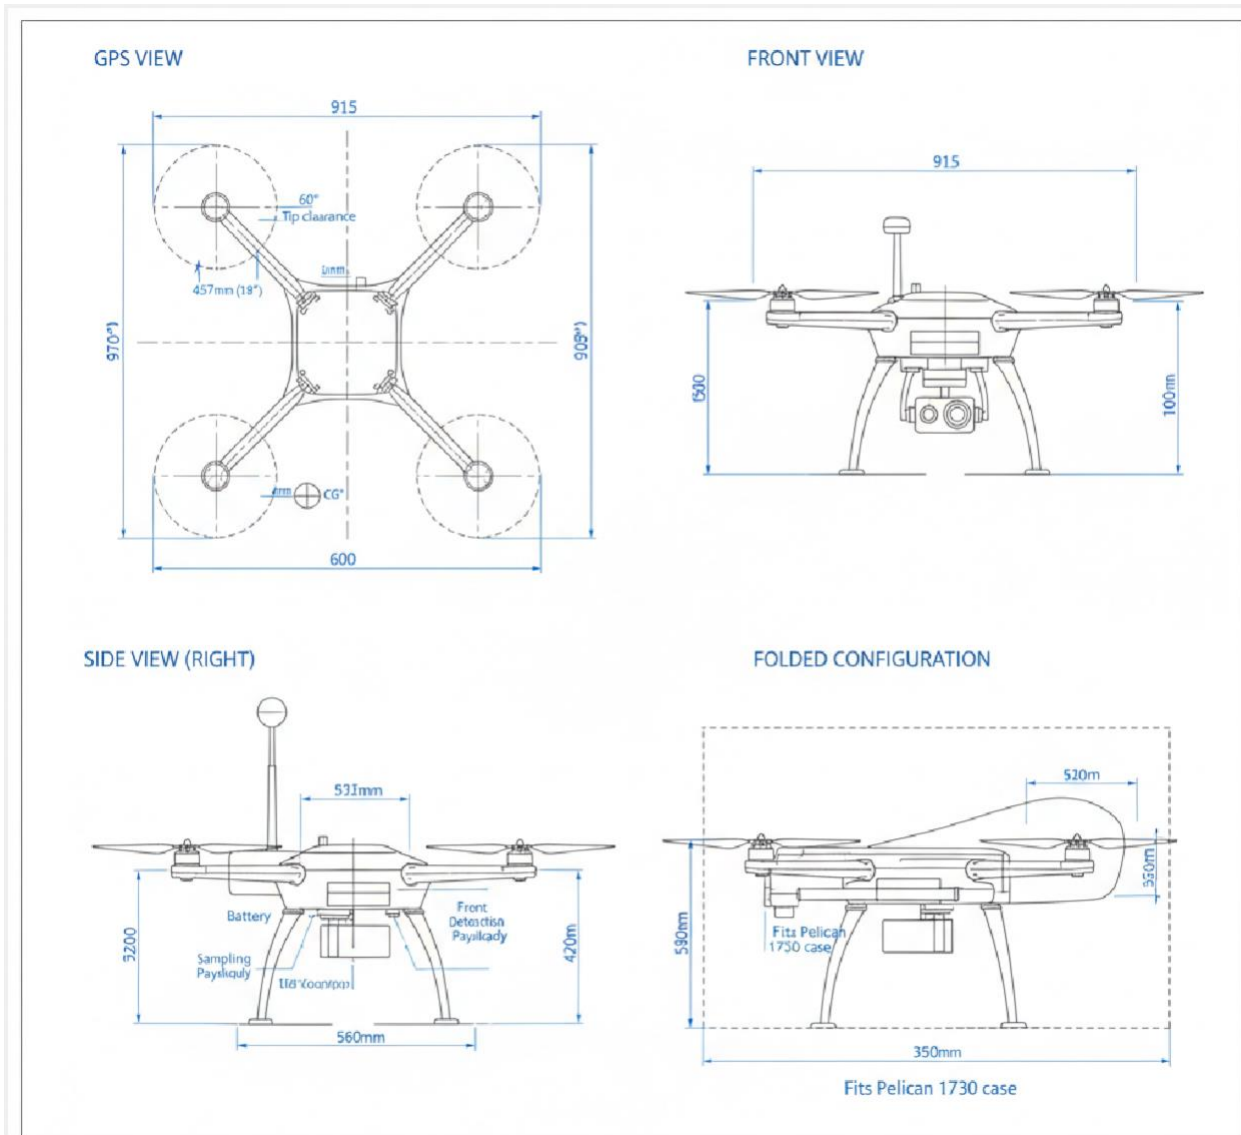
Aircraft 3-view drawing with dimensions showing top, front, and side views
